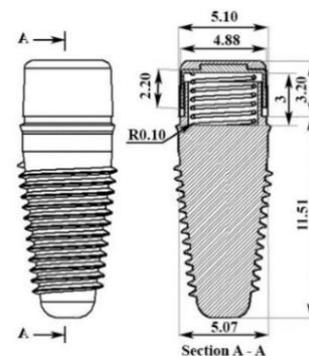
Side and sectional views and main dimensions of Resilient Implant with micro-movable element.
